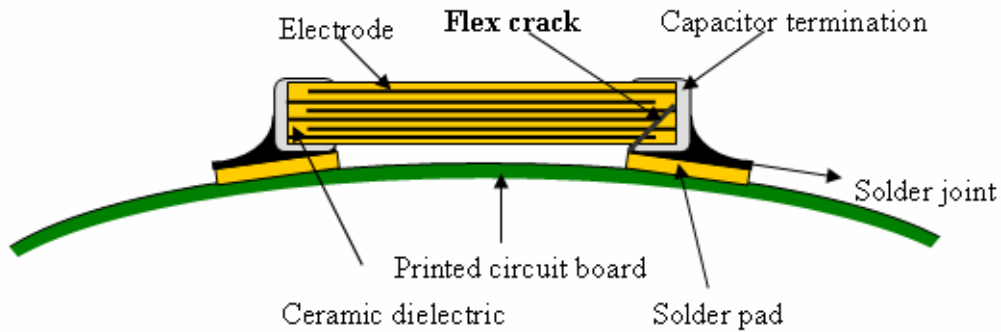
Flex cracking of MLCCs due to printed circuit board bending.
